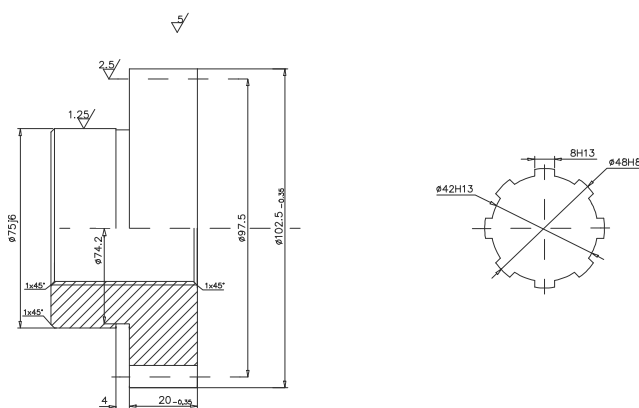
Executive drawing of analysed cylindrical gear wheel with straight teeth [5]
